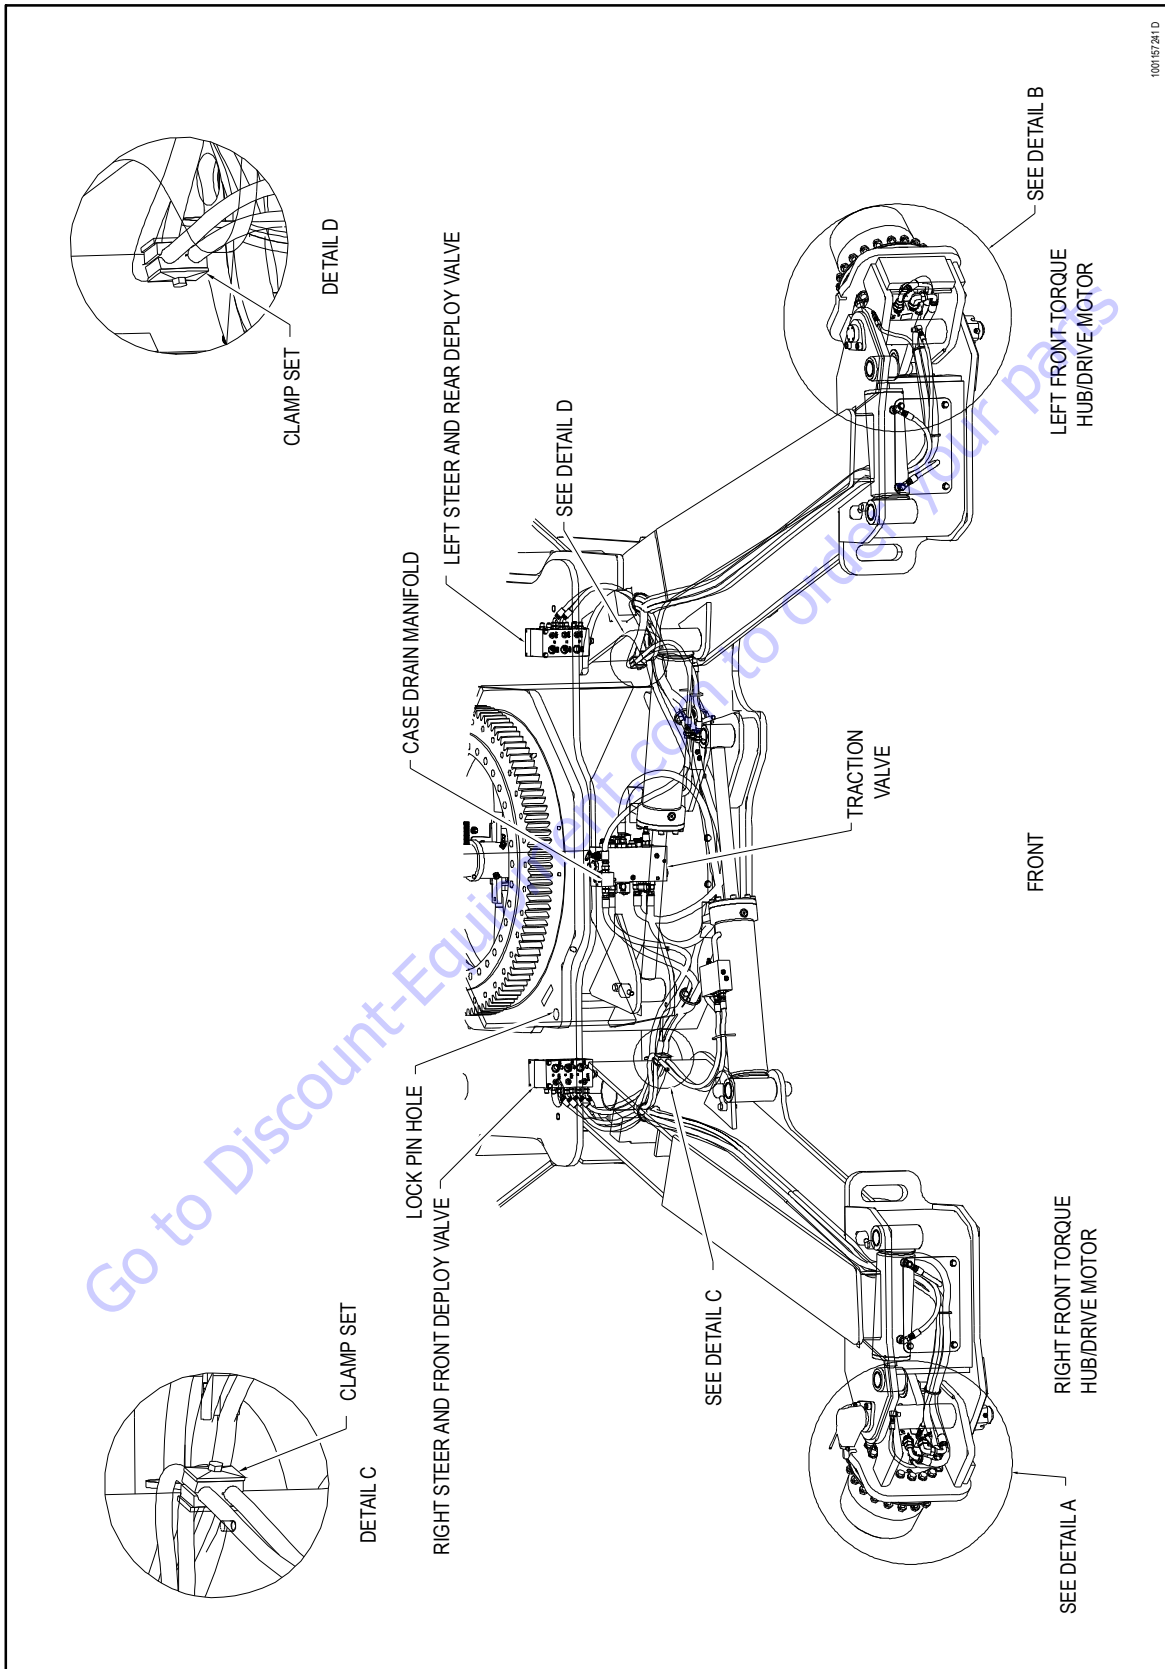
Chassis Hose Routing - Sheet 2 of 7
